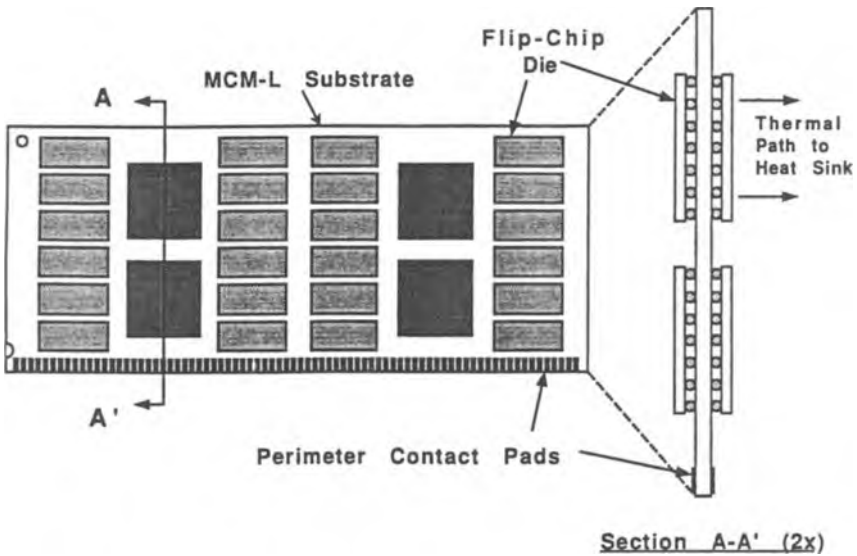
Schematic of dual surface MCM-L assembly. Features: SIMM I/O, dual surface assembly, flip chip assembly.
